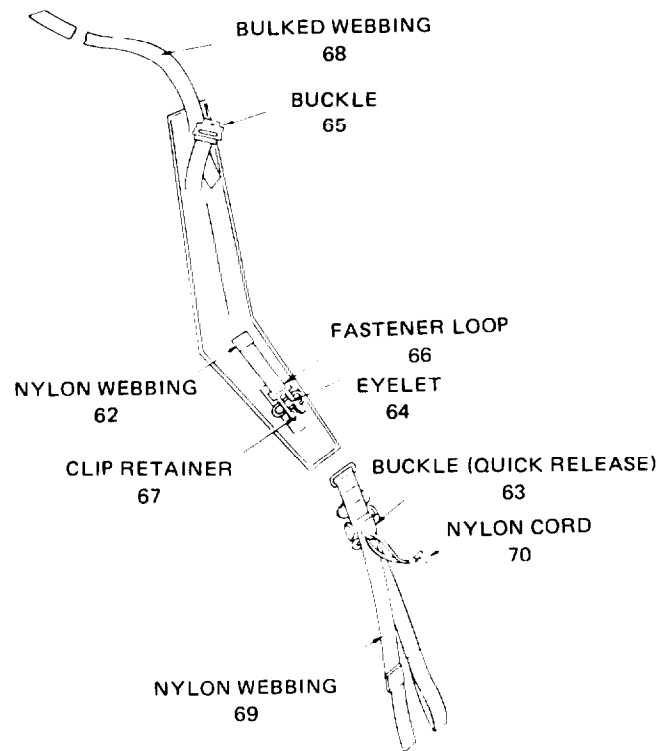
Strap, Shoulder Pack Frame and Field Packs, Left Hand; With Quick Release Assembly.
